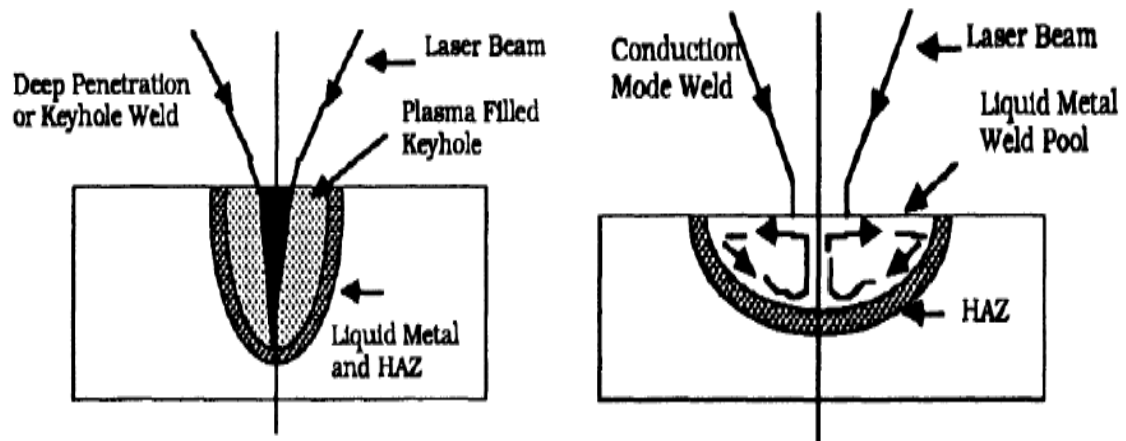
Keyhole welding (on the left) and conduction-mode welding (on the right). [10]
